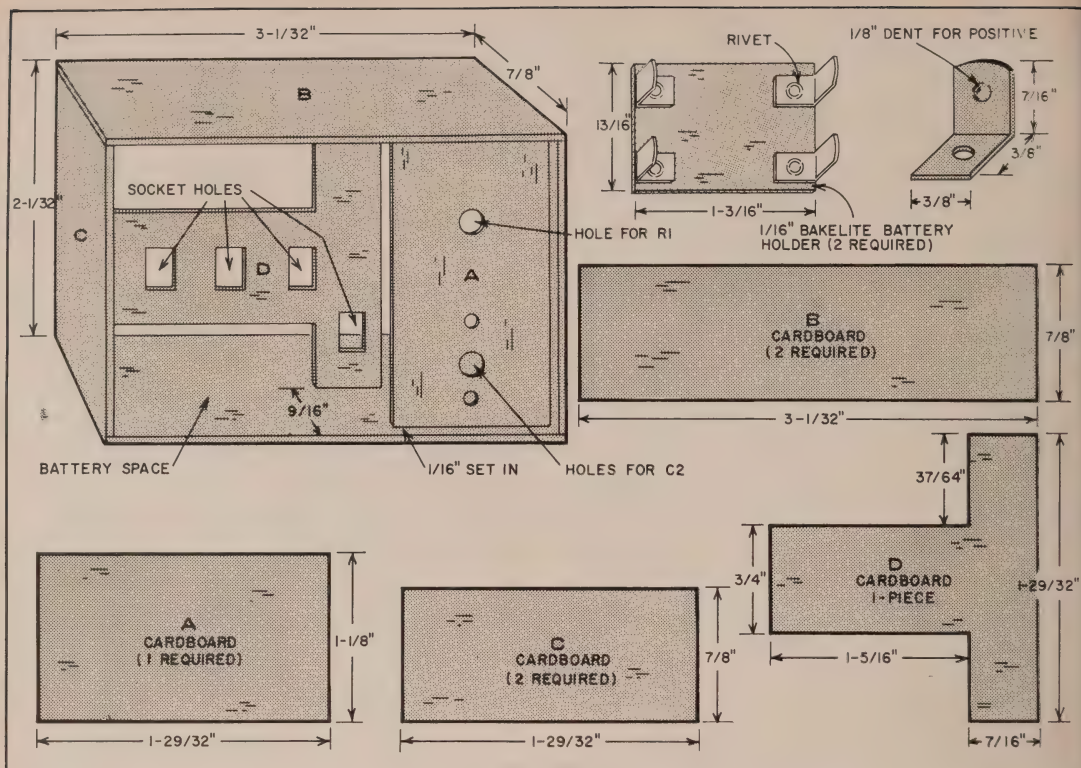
Chassis assembly for the flip-top radio. If you use the printed-circuit board, only parts C and B are needed.
